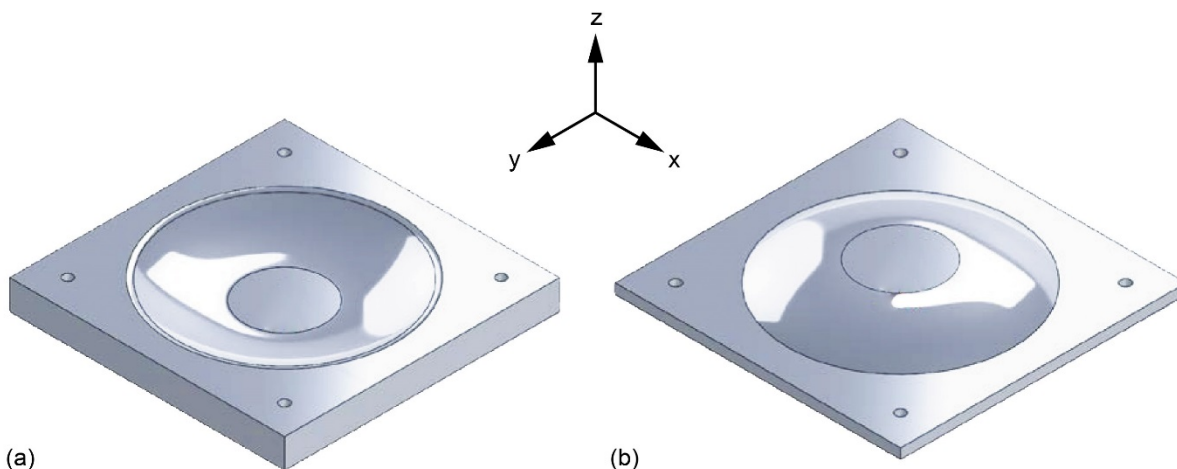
Tool design for composite web formability trials. (a) Convex mold. (b) Concave mold.
